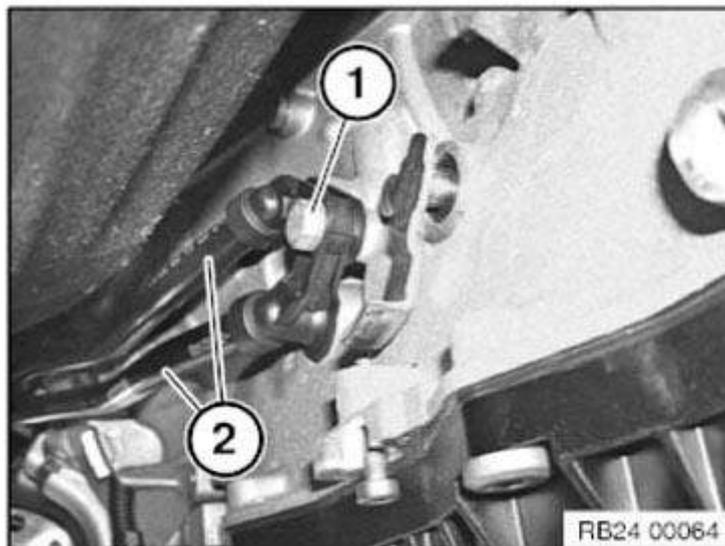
Identifying Hydraulic Lines To Transmission Oil Cooler And Screw
